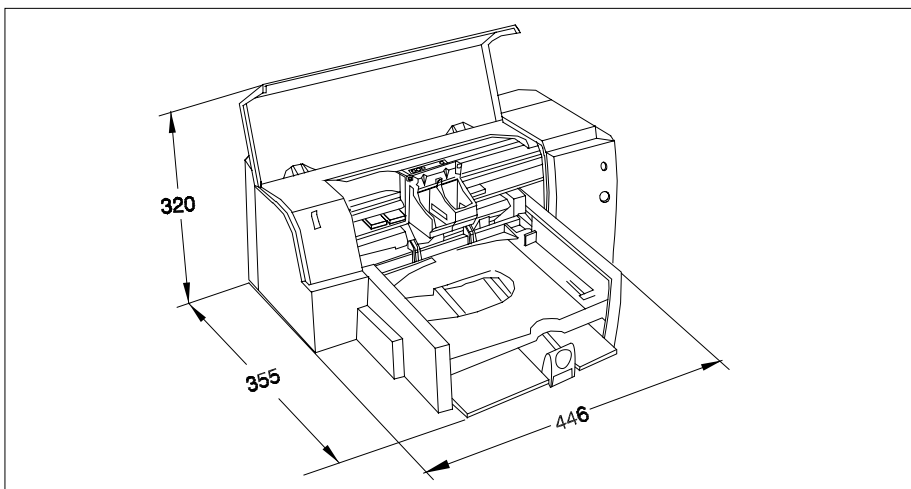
Dimensions of the color hardcopy printer DPR 02 (example)
